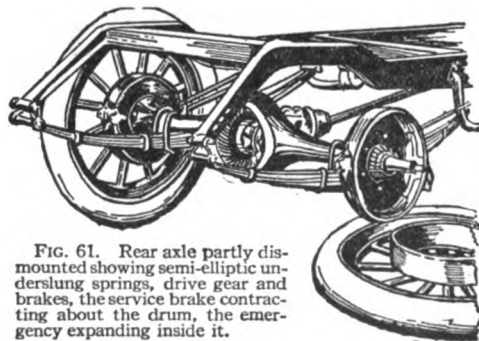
Rear axle partly dismounted showing semi-elliptic underslung springs, drive gear and brakes, the service brake contracting about the drum, the emergency expanding inside it.
